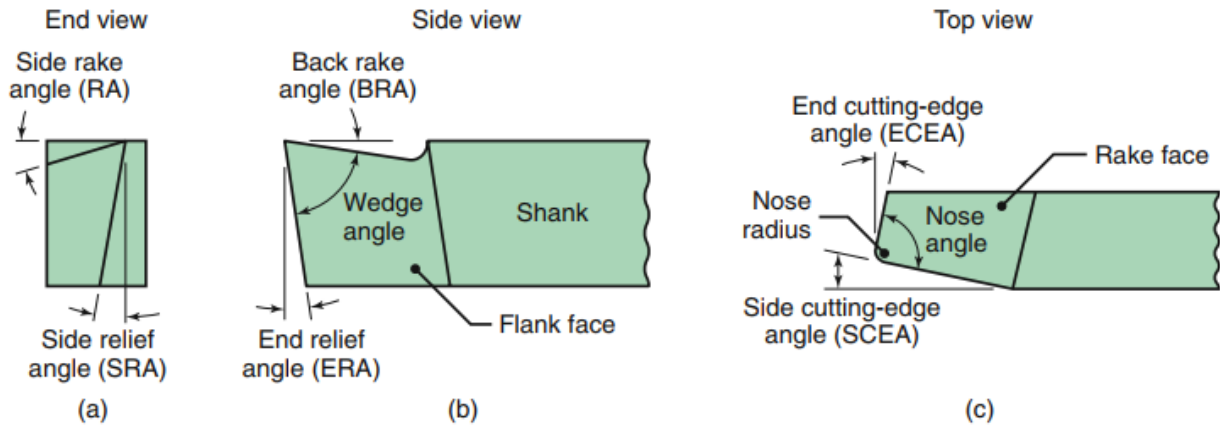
Designation for a typical cutting tool for turning process from (a) end view, (b) side view and (c) top view [11].
